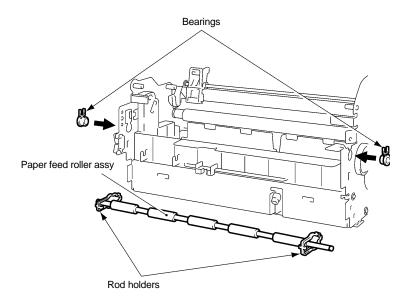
Installing the Paper Feed Roller Assy (1)
